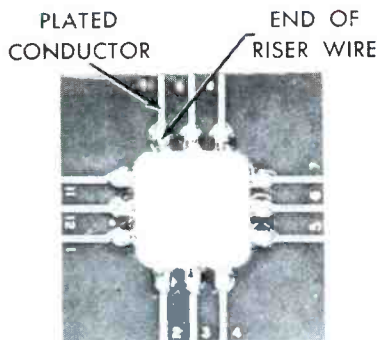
Circuit Board Before Removal of Ends of Risers.
